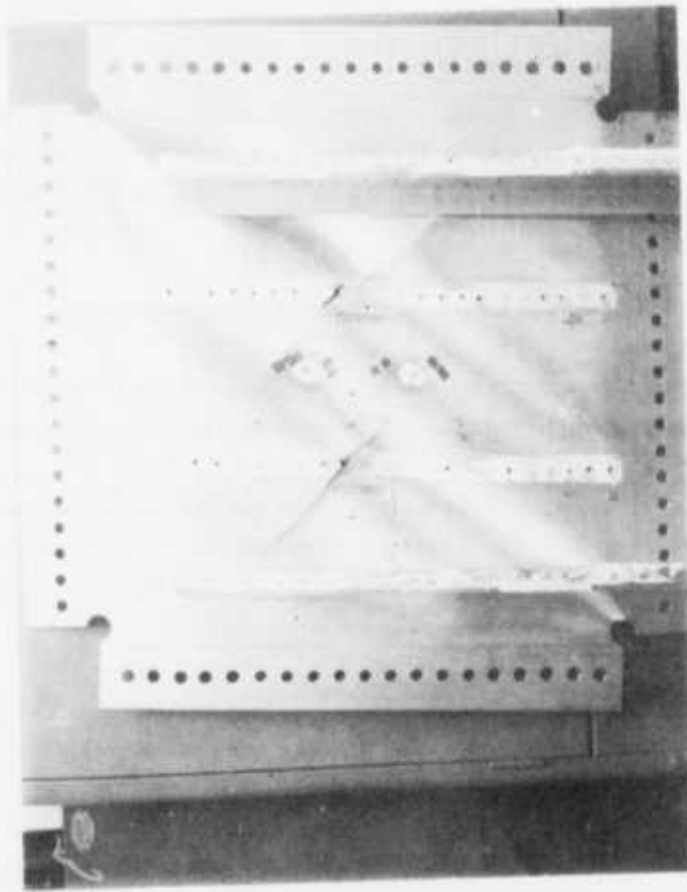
FAILED WELDBONDED SHEAR PANEL
